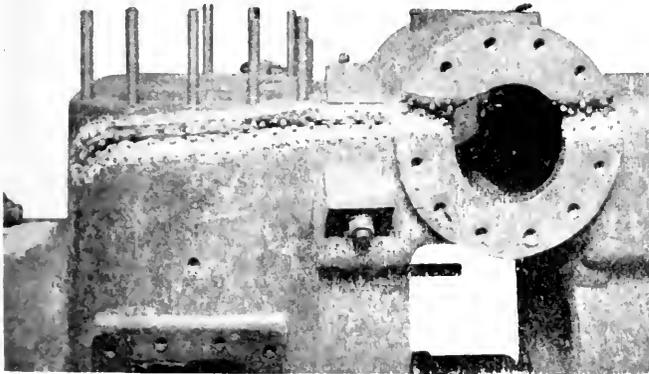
Casting Prepared for Welding by the Studded Joint Method
